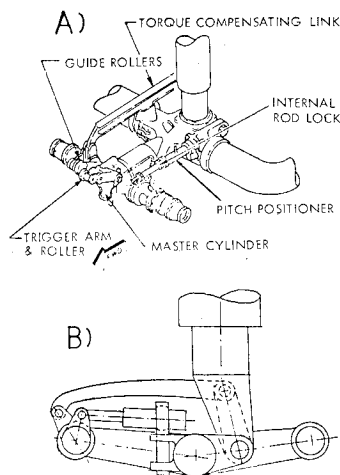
C-5A main landing gear bogie pitch positioner mechanism and location.
